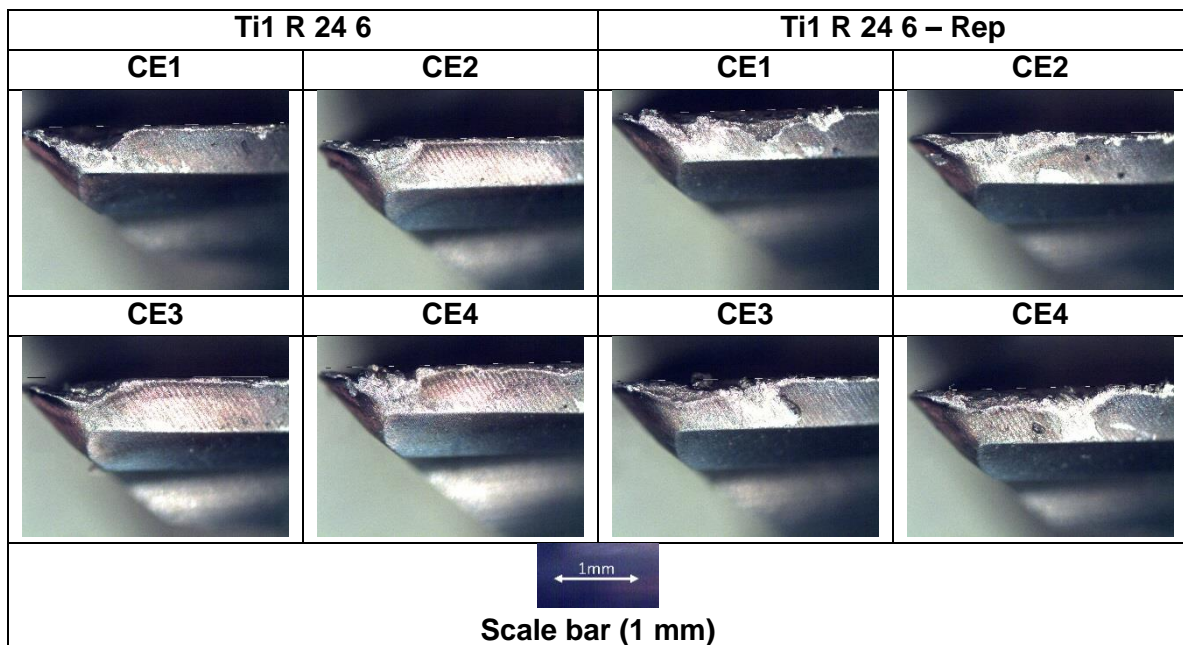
An example of tool wear in end-milling of Ti-6Al-4V (4-flute end-mills)
